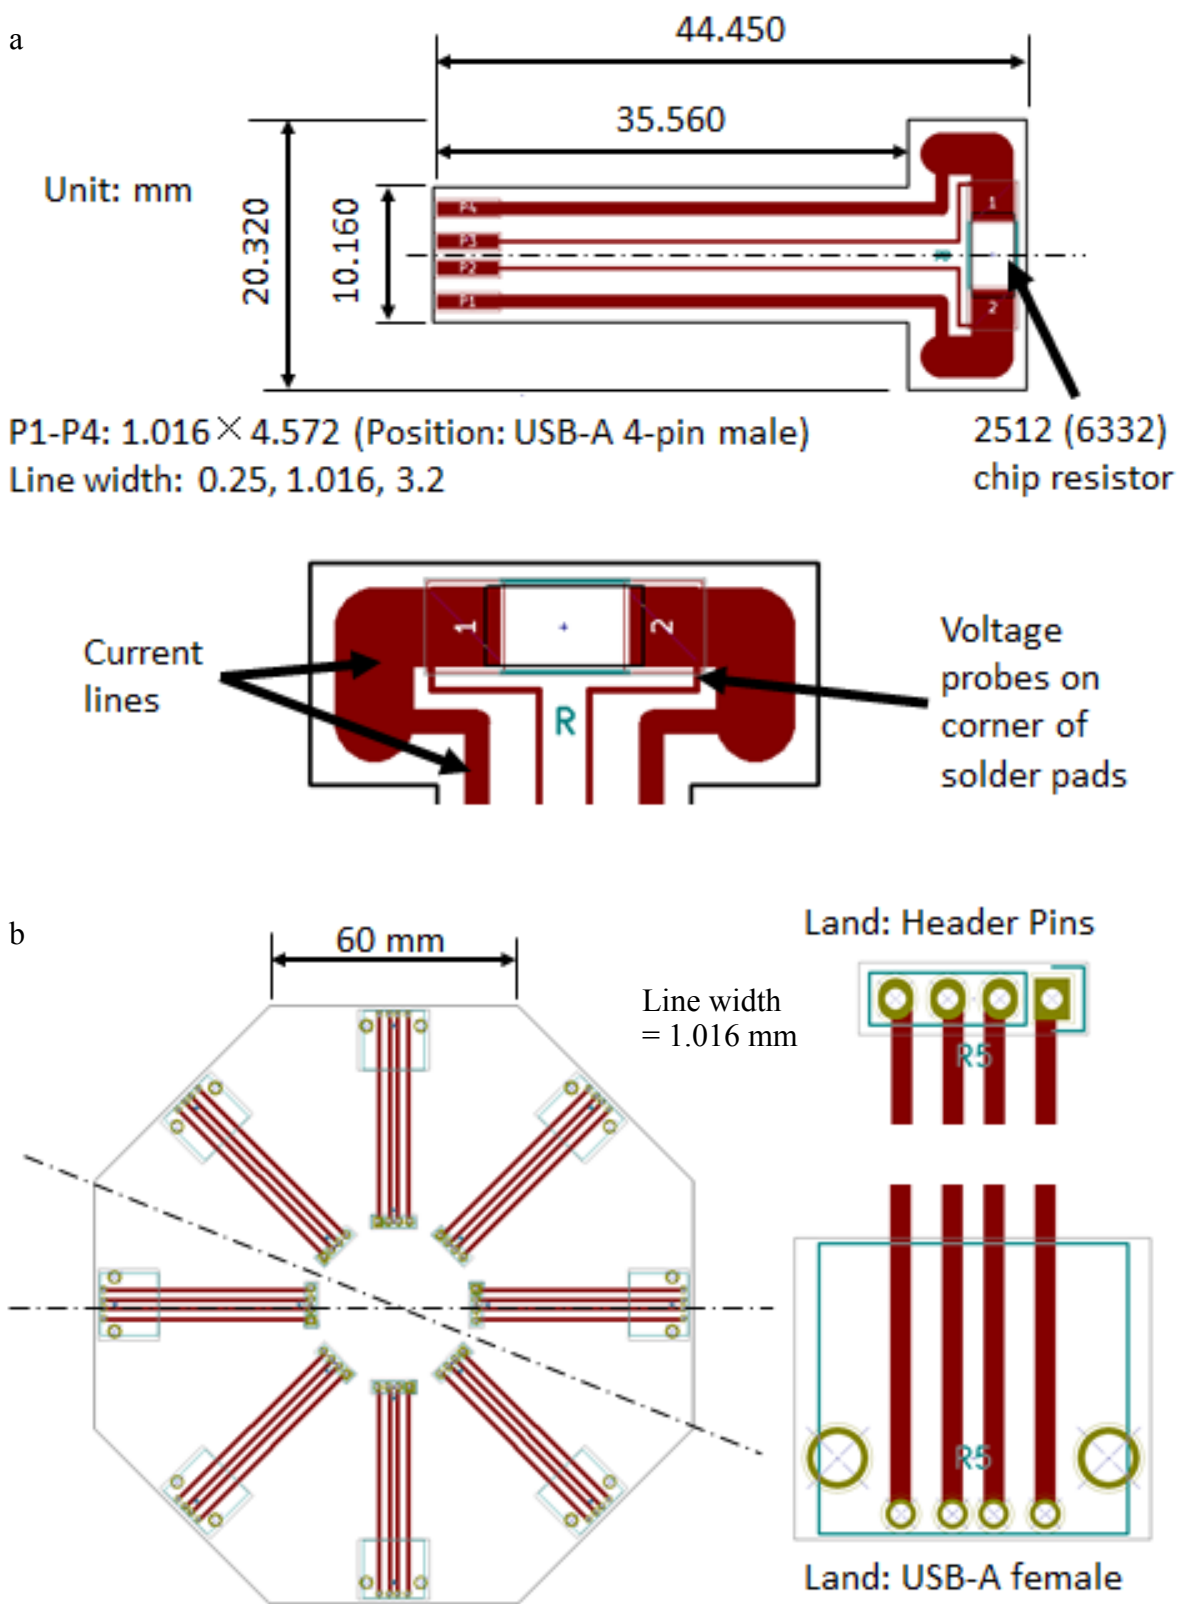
PCB design for study II: (a) daughter board, (b) mother board.
